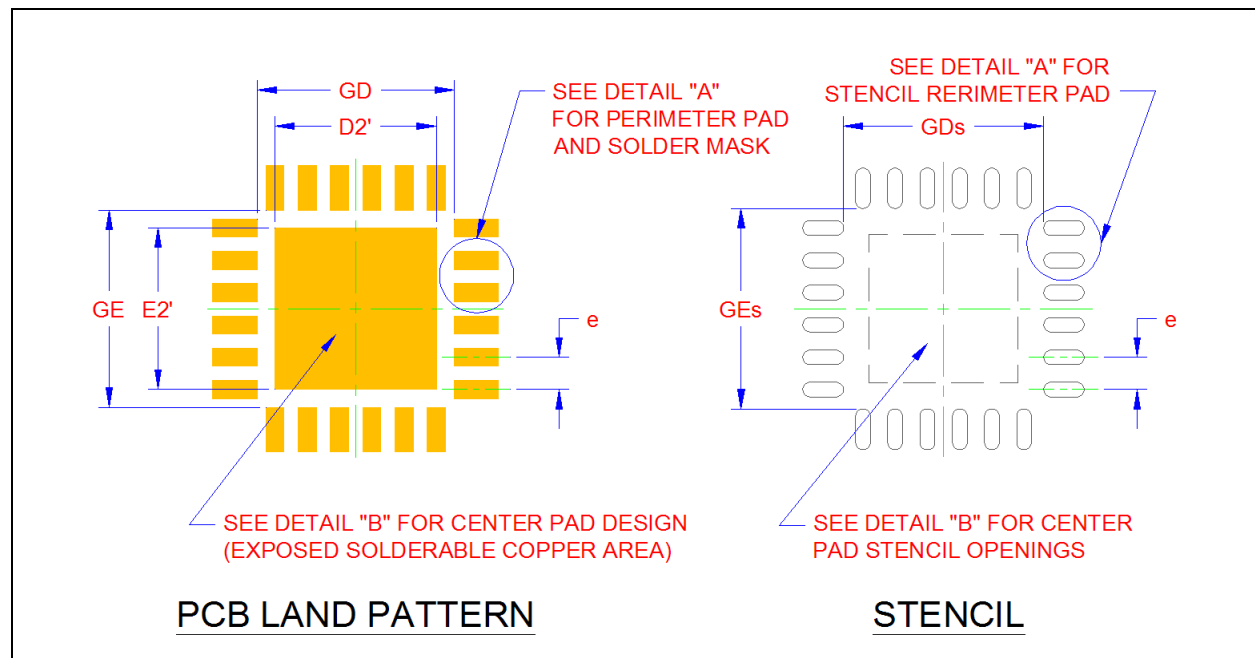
CAP1188 Package Drawing - 24-Pin QFN 4mm x 4mm
